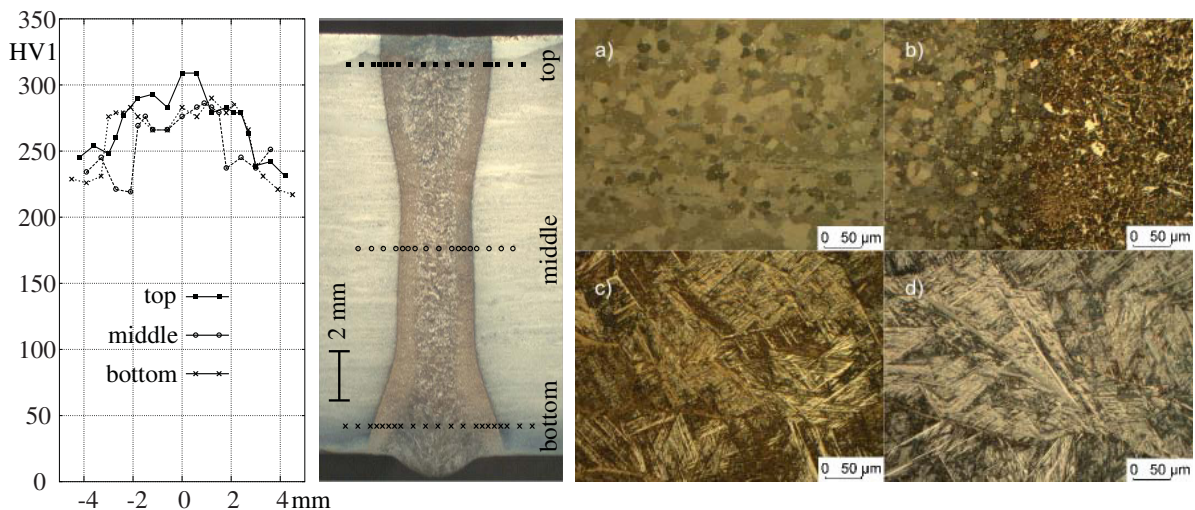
Welding with trailing nozzle with Argon 5.0. Left: macrosection with the hardness in the top, middle and bottom of the weld seam. Right: microsections of a) base material, b) HAZ, c) and d) weld seam. Welding parameters: laser power 19 kW, focus -8 mm, welding speed 1.8 m/min.
